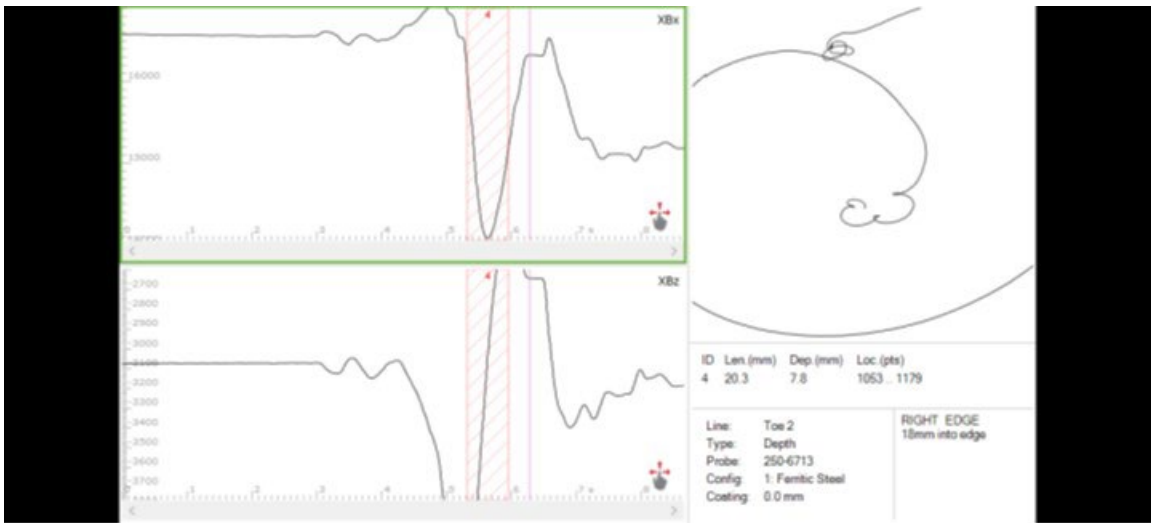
ACFM scan data of Flaw 2 for fillet weld TTCI-P2 panel
